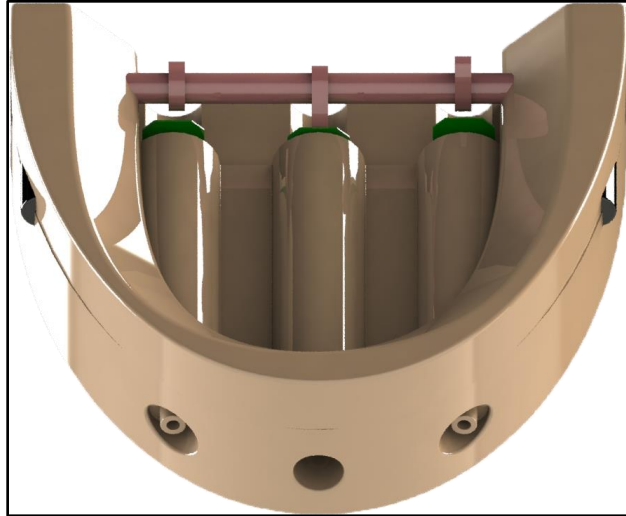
Front View of Rendering of Camshaft Based Actuation Mechanism
